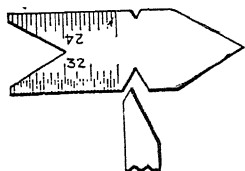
Center gauge. A thread tool ground as shown will cut close to a shoulder if desired.
